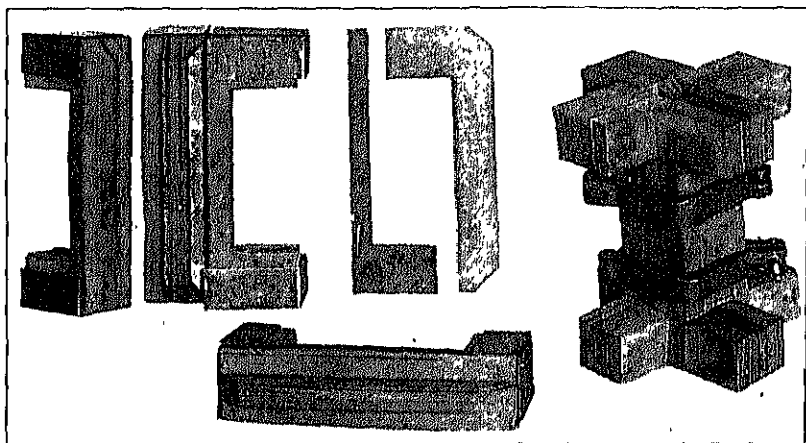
Shape of punching and method of assembling core of small four-part distributed core type transformer.
